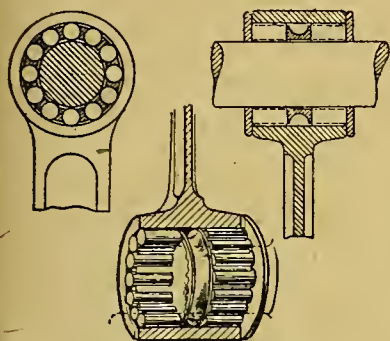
Triumph Co.'s connecting rod bearing. Pat. No. 122,559. 10/4/18.
